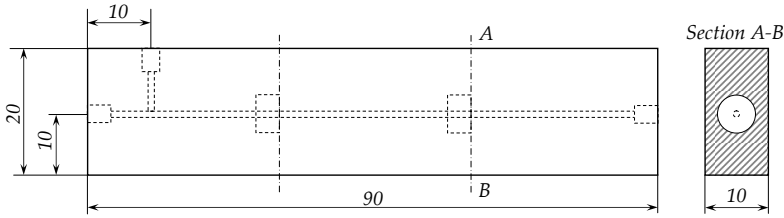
Sketch of the bubble generator showing section A-B. Units are in mm.
